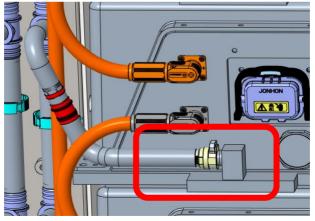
Connect tertiary outlet pipe connector to male connector of battery packs3. Each secondary outlet pipeline is fixed to the inner hole of the sheet metal part
